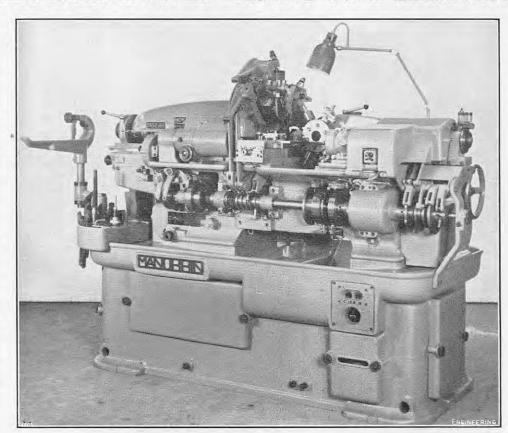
Manurhin Automatic Lathe; Drummond-Asquith (Sales), Ltd.
